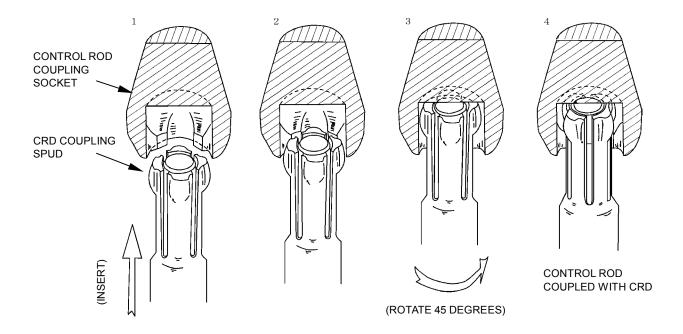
Control Rod to Control Rod Drive Coupling
